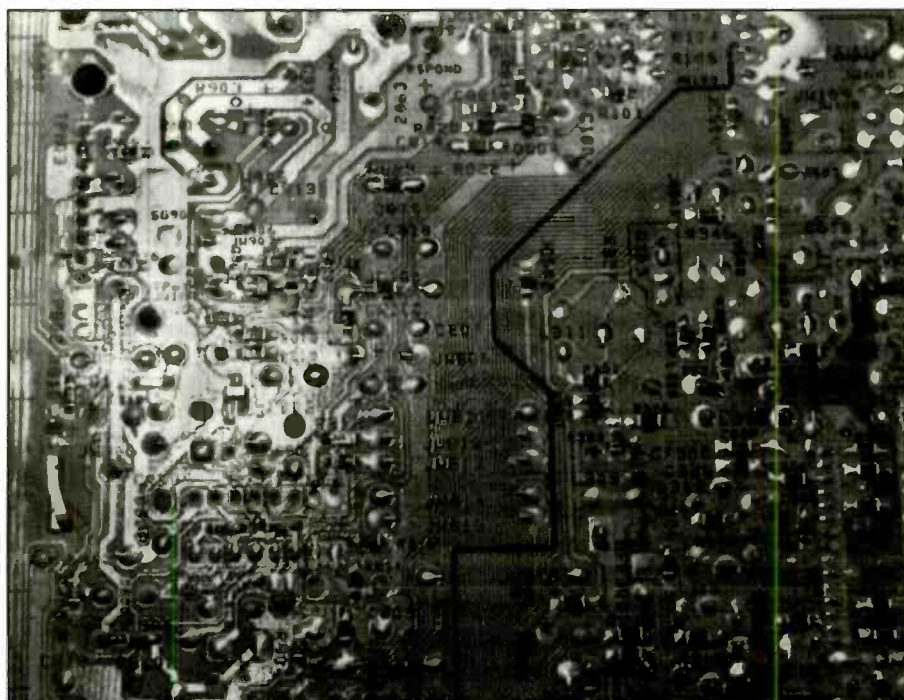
Notice the tiny surface mount devices (SMDs) and thin PC wiring on the bottom side of the PC board.
